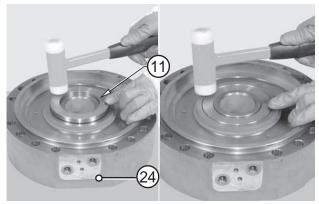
Using a plastic hammer, install the piston (11) into the cylinder (24).
